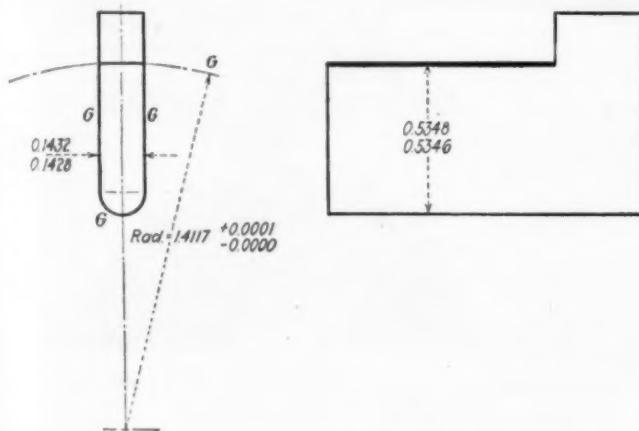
STEEL BLADE USED FOR PUNCHING ARMATURE DISKS
